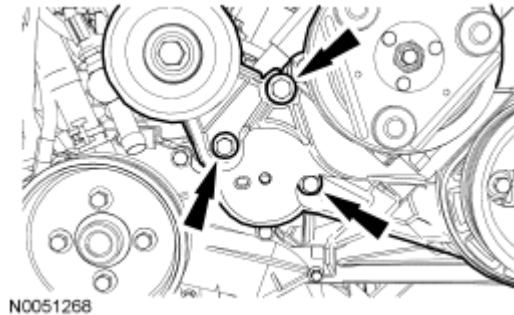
Locating Power Steering Pump & Mounting Bracket
